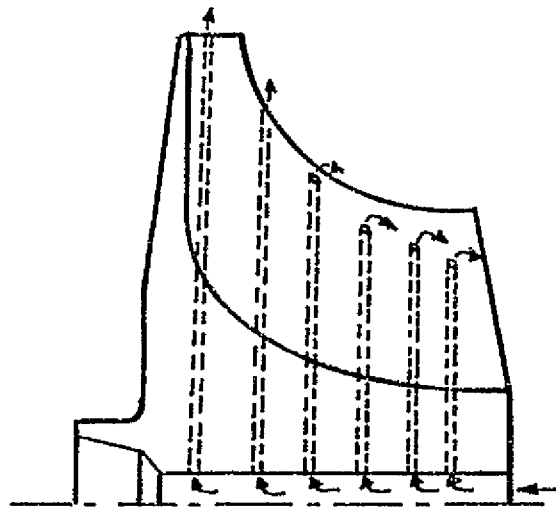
ONE OF THE ROTOR TWELVE UNITS
